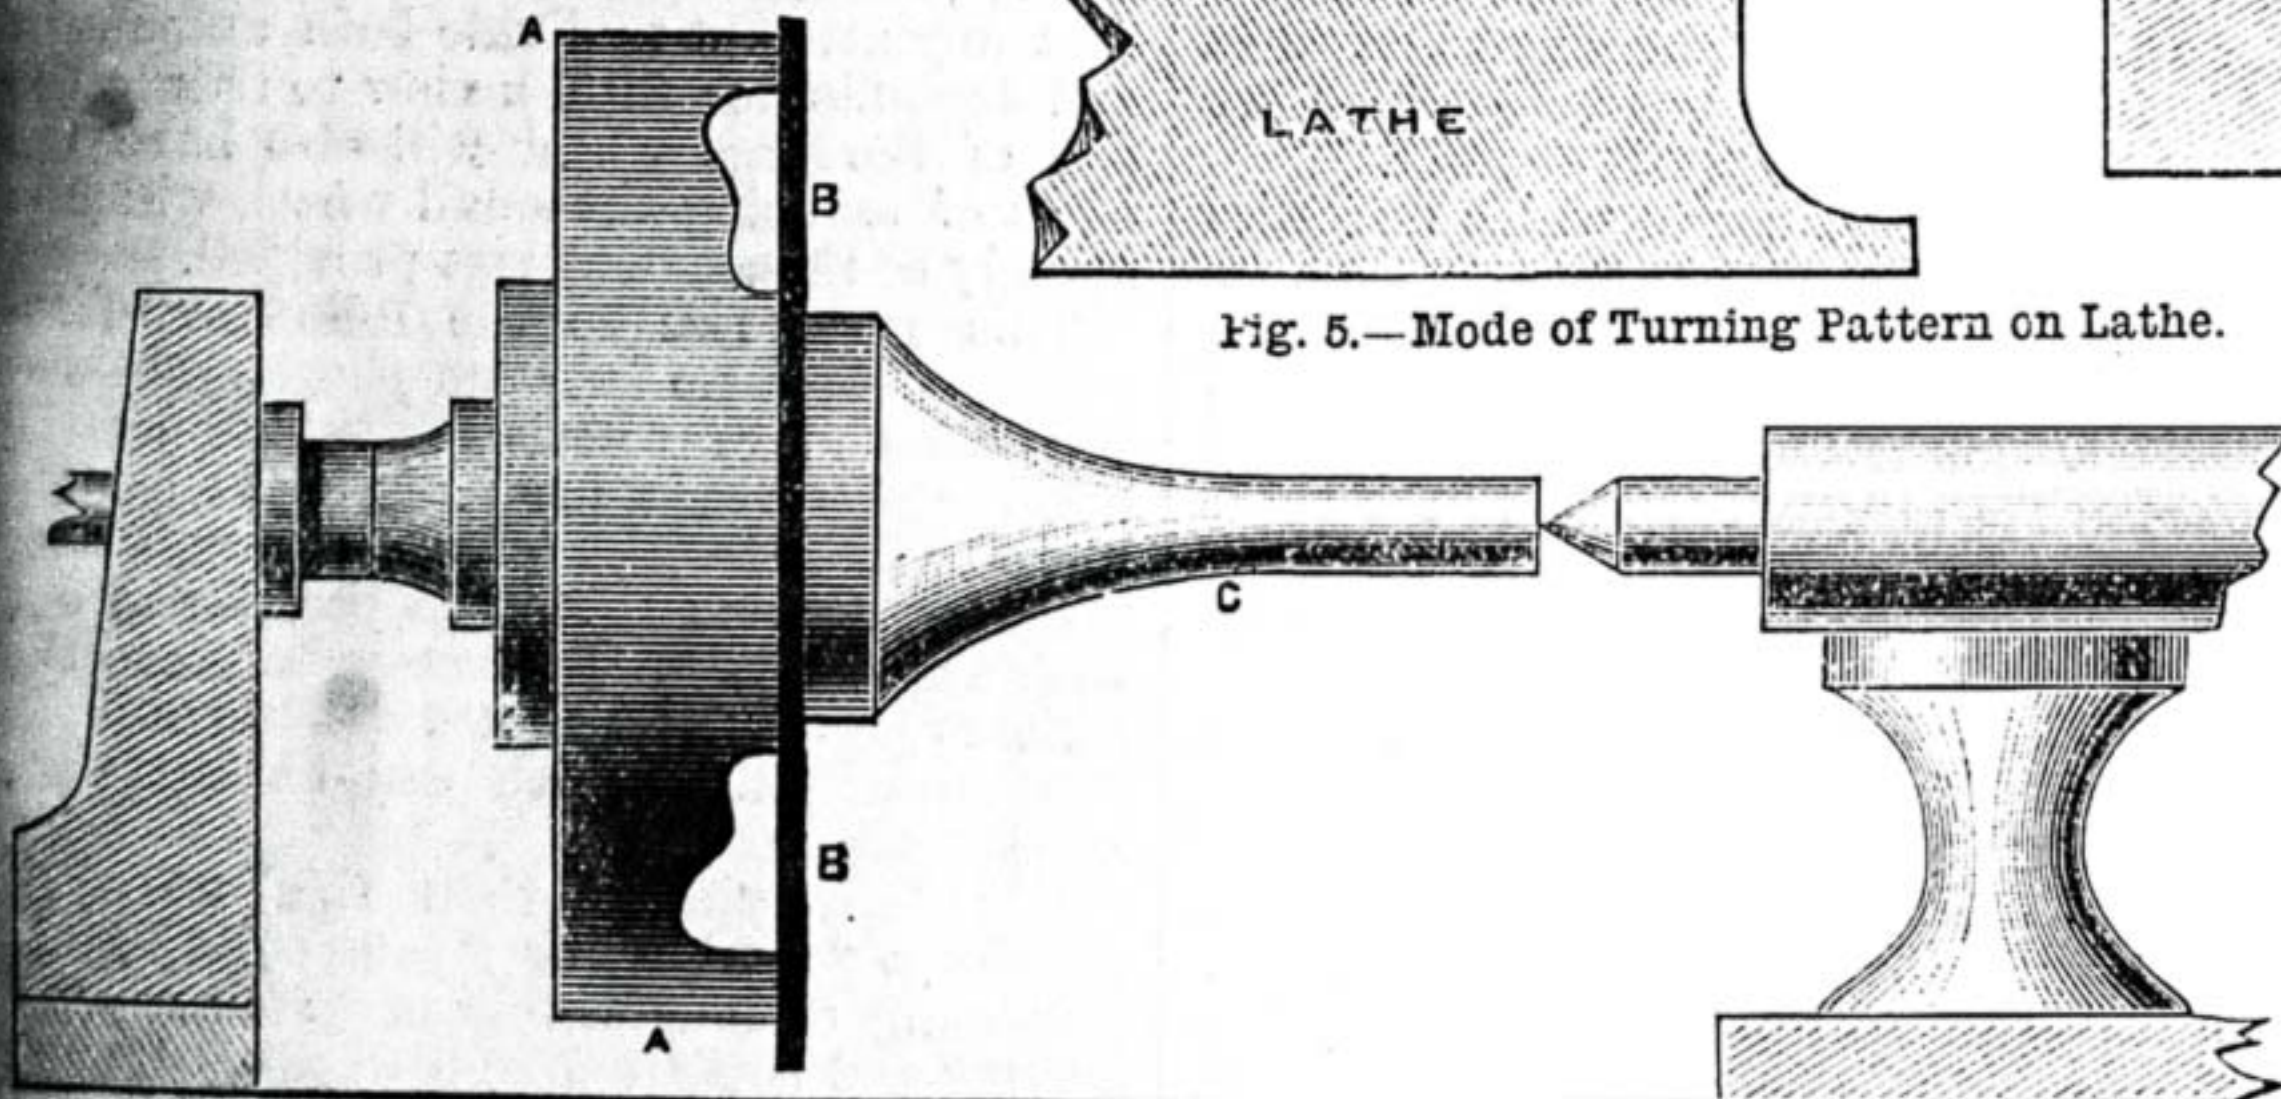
Sketch showing Pattern (A), Sheet Metal (B), and Holder (C) in Position on Lathe.
